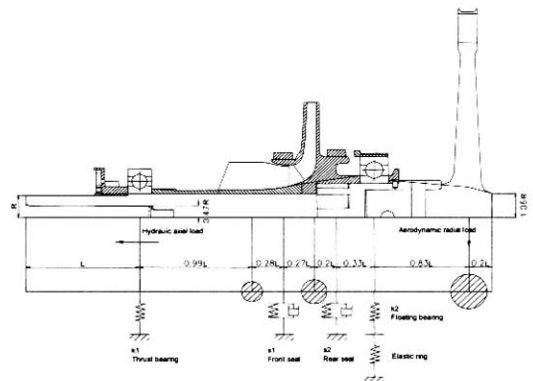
2-D layout of fuel pump and turbine rotor system
